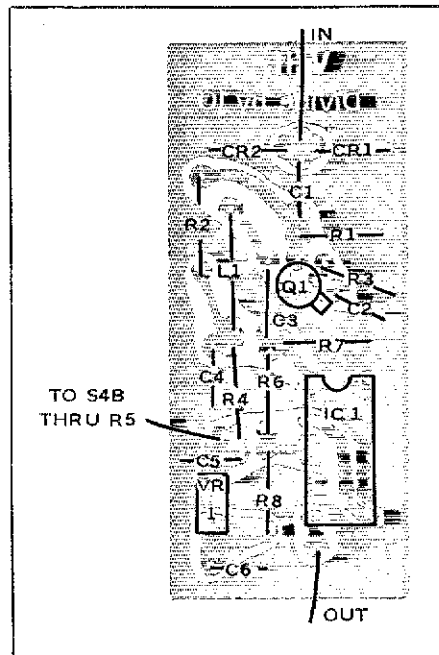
Parts placement guide for the vhf prescaler. The shaded area represents an X-ray view of the copper pattern. The etching pattern appears in the "Hints and Kinks" section of this issue. The board is double-sided copper clad, with all but a small strip etched away from the component side (see the photo and Fig. 3).
